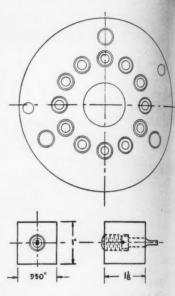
Steel Block Used to Grind Punch Ends Concentric with the Shanks
